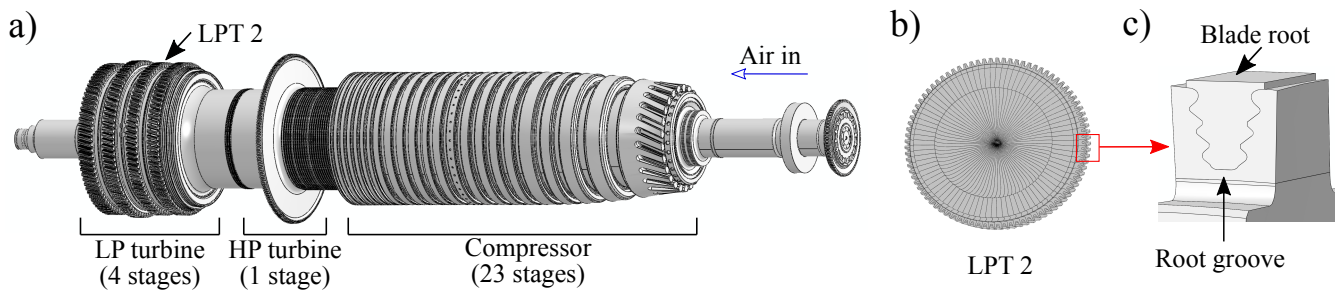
Gas turbine rotor components showing a) compressor, low and high pressure turbine sections, b) 2nd stage of the low pressure turbine, c) a fir-tree joint through which mechanical loads are transferred from the blade to the rotor.
